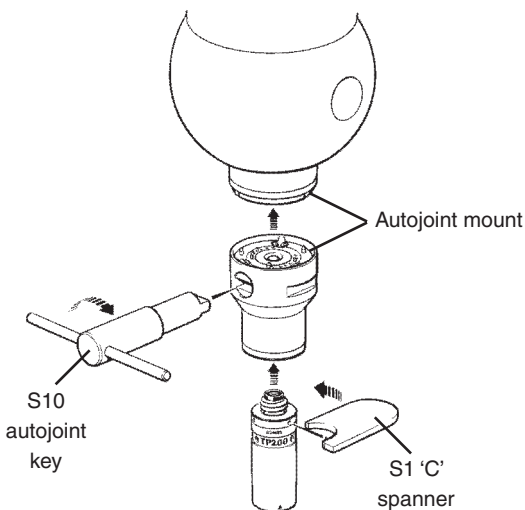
Fitting the TP200 probe body to a probe head with an autojoint
